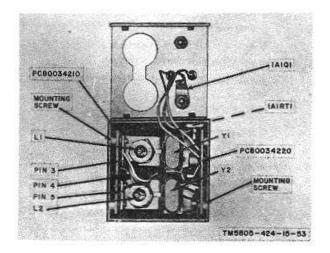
Crystal oscillator and oven assembly, cover removed.
